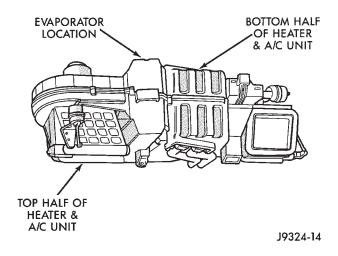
Evaporator Coil Location in Heater-A/ CHousing (Upside Down)
